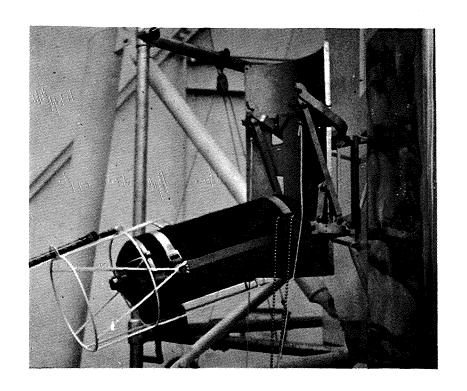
PROTECTIVE DEVICE INSTALLED ON CASK UTILIZING PREVIOUS DOME REMOVAL TOOL
